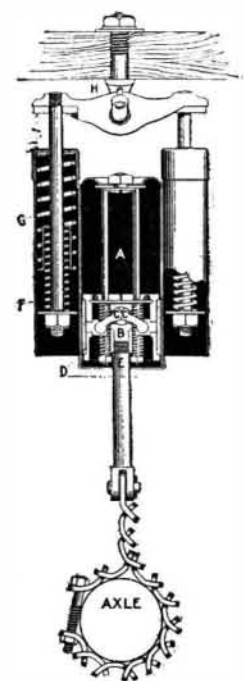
View Showing the Combined Spring Recoil and Friction Check Partly in Section.
